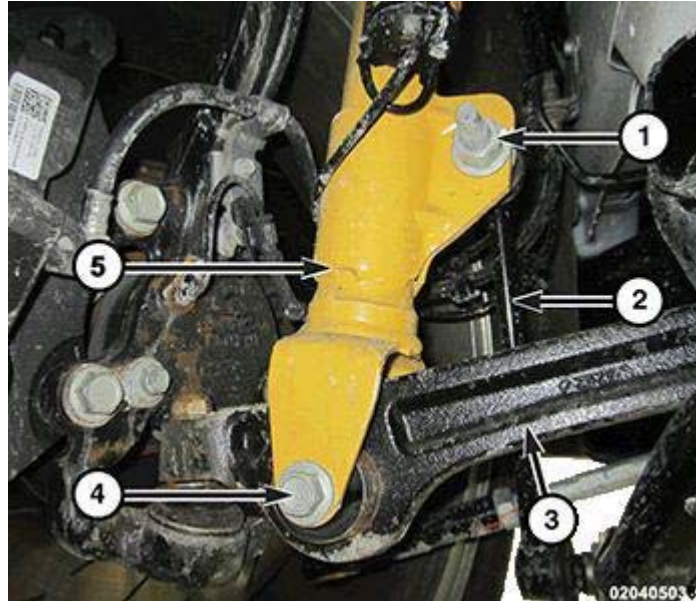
Stabilizer Link To Strut Nut, Stabilizer Link, Lower Control Arm, Lower Control Arm Bolt & Shock/Strut Assembly
